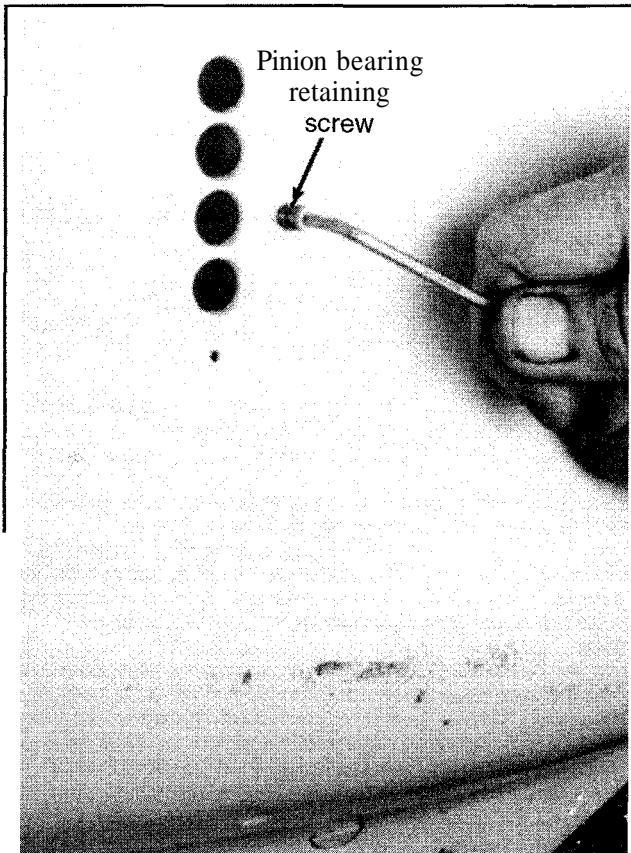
Remove the bearing retaining circlip or set screw (pictured), as applicable, before attempting to remove the pinion bearing
